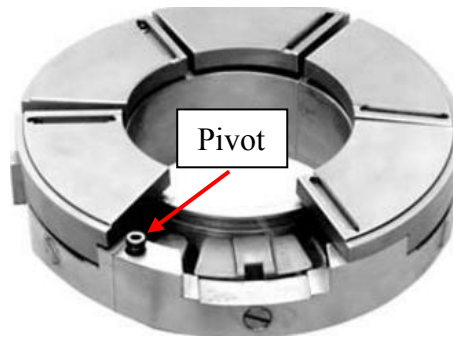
Pivot at the back of a pad in a tilt pad air bearing
